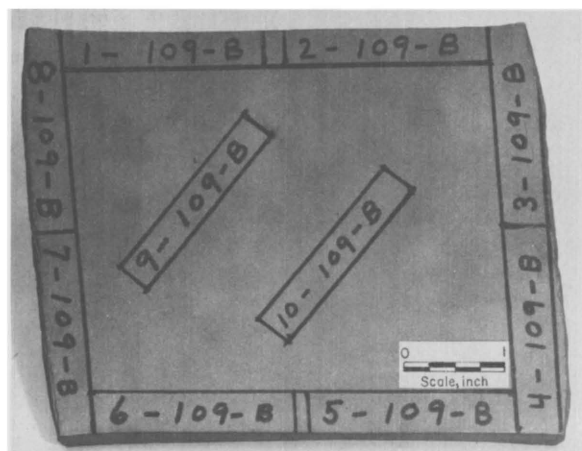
Layout for cutting coupons for machining Charpy V-notch impact specimens from rolled plate.
